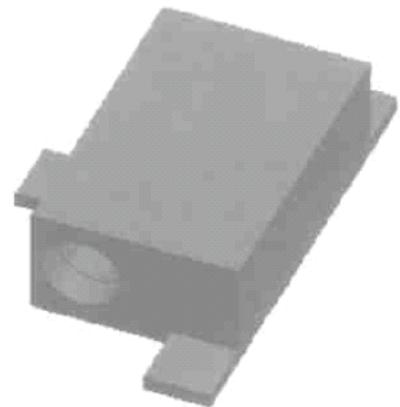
A workpiece requested to design a fixture (Maximum size is 80 mm × 49 mm × 22 mm)
